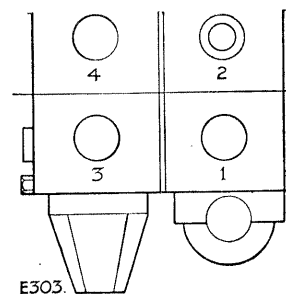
Rear view of control valve showing positions of adaptors and union
